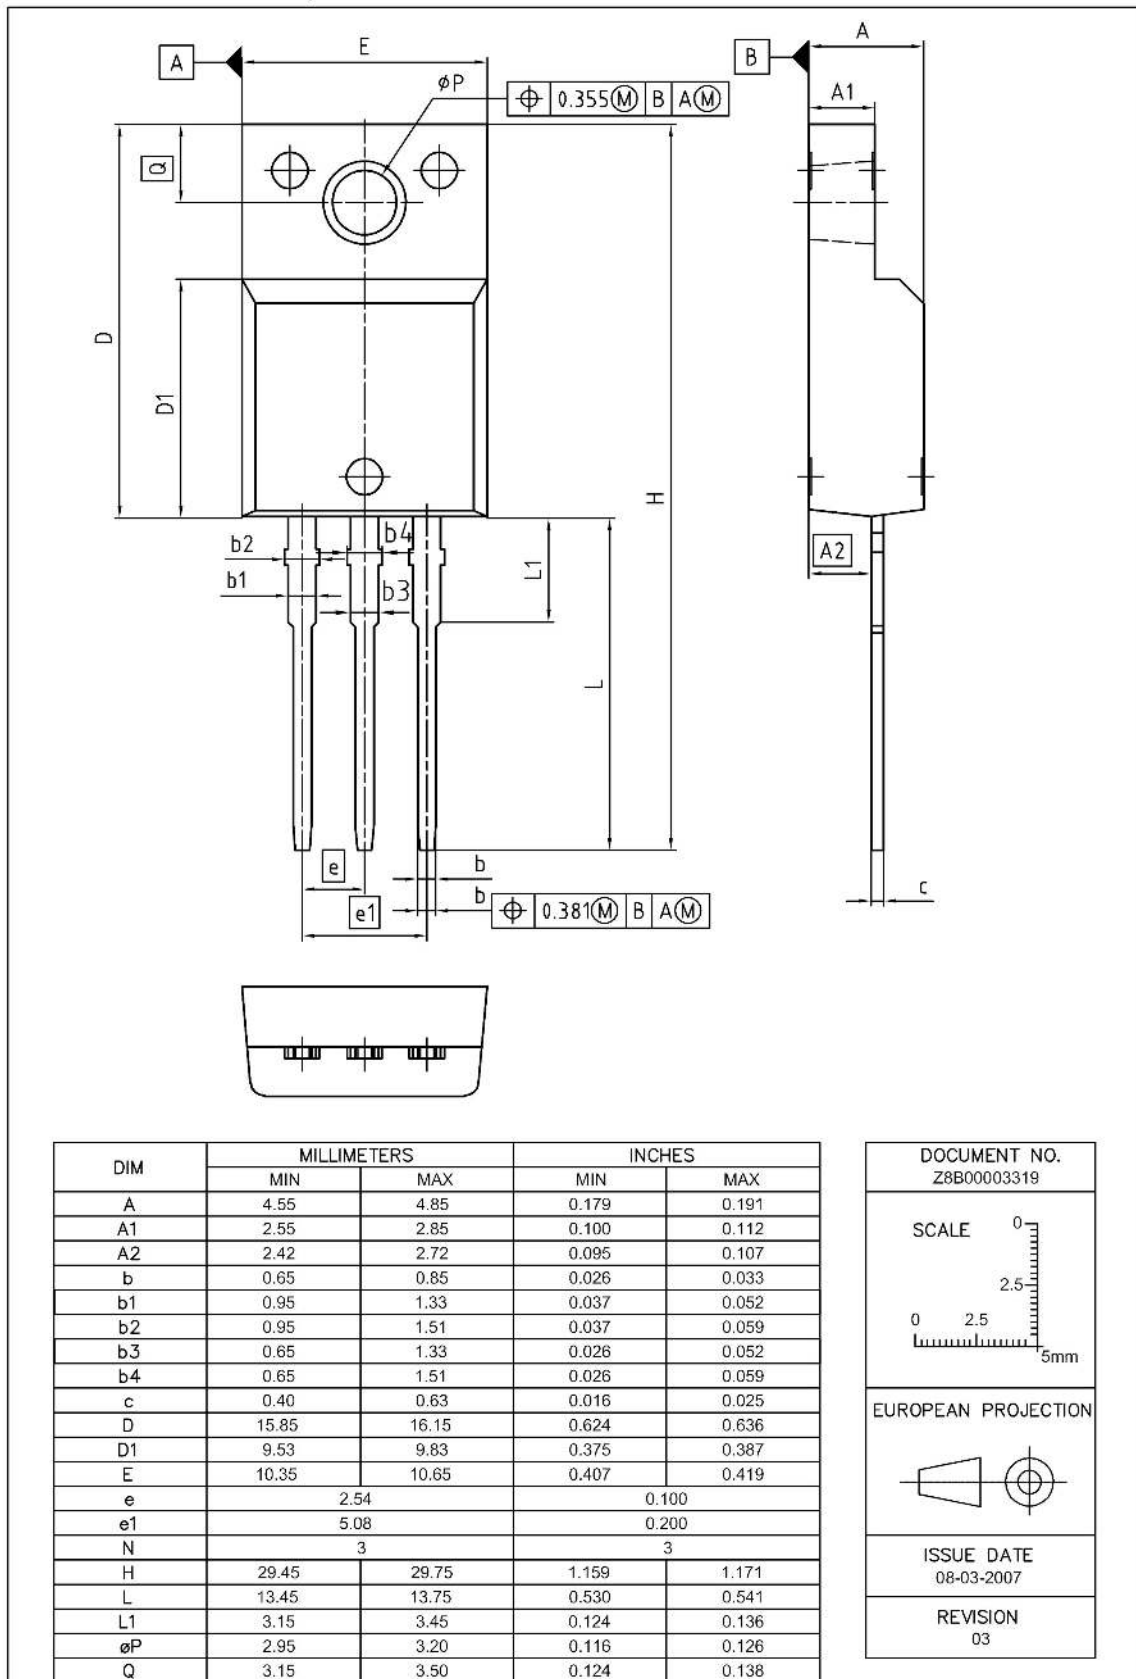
Outline PG-TO 220 FullPAK, dimensions in mm/inches
